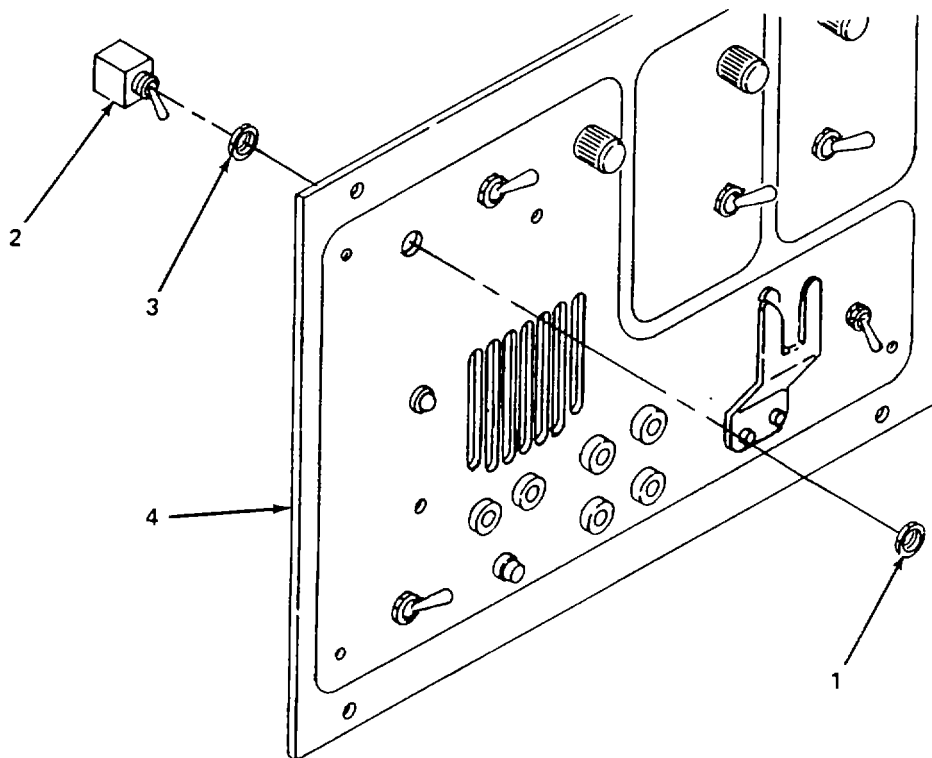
Front Panel Chassis Assembly Switch, Replace.
